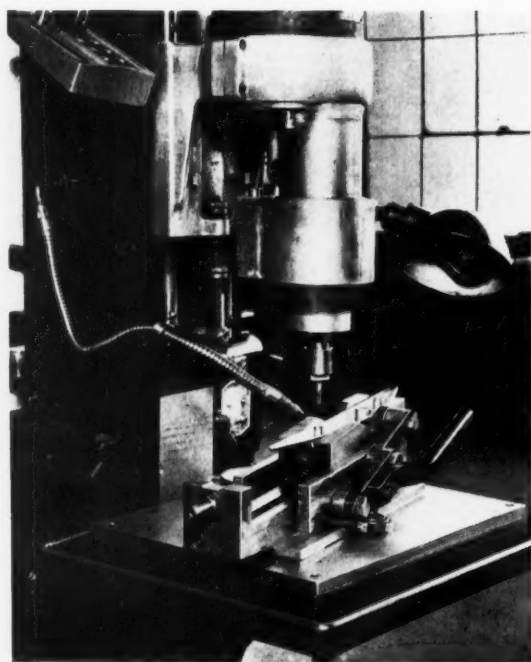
A Simple Fixture for Drilling Ten Holes Simultaneously in a Die-cast Radiator Grille
